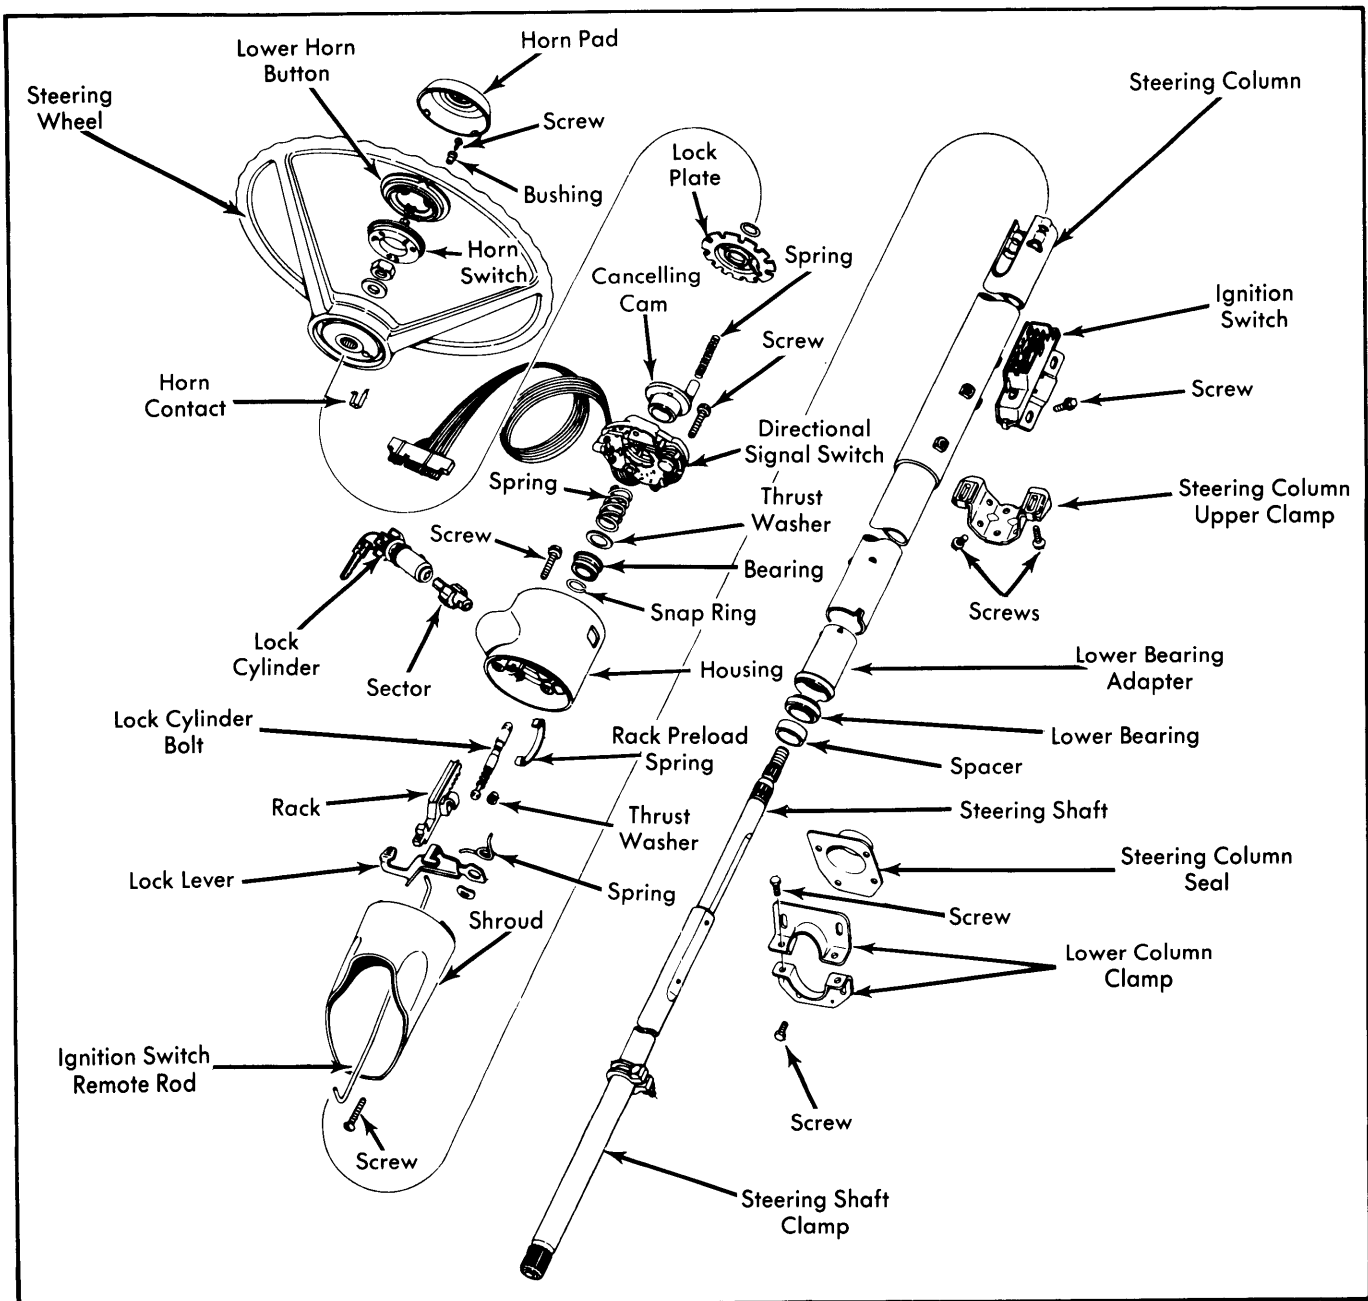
Exploded View of Scout II, Terra and Traveler Steering Column
